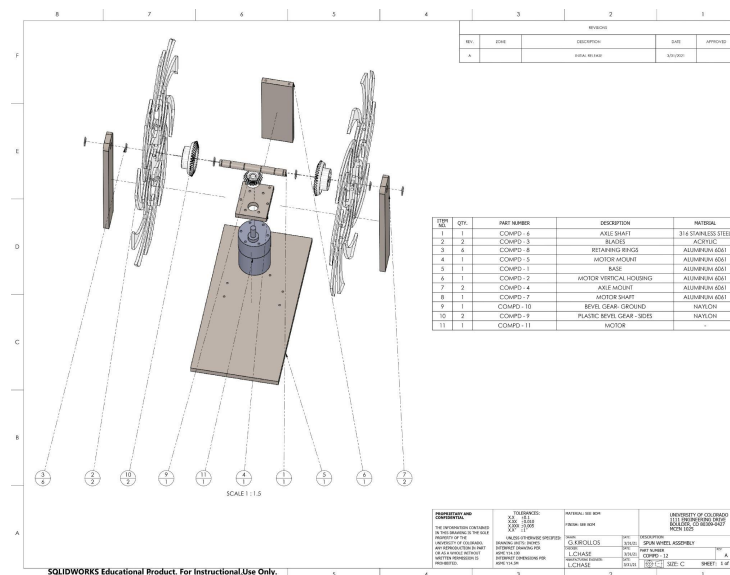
Exploded view of the Ninja Star assembly and BOM table.
